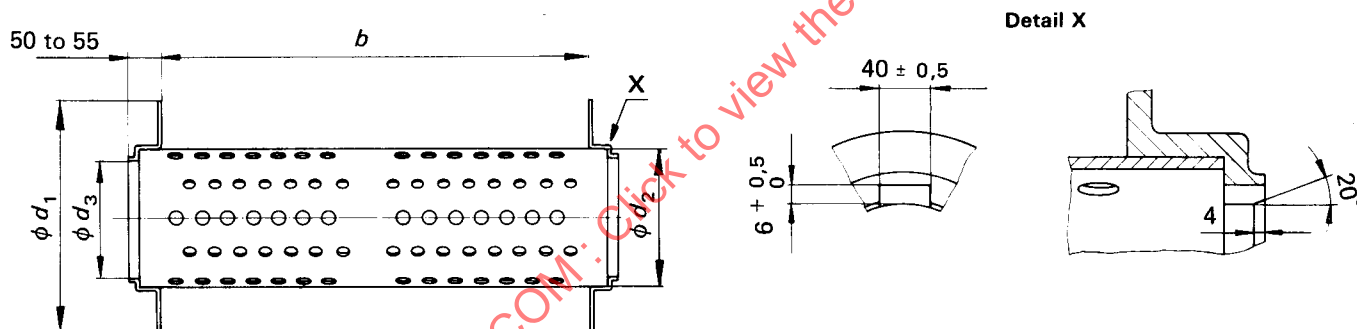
Type B : Beams with flanges and counter shoulder, and driving device
